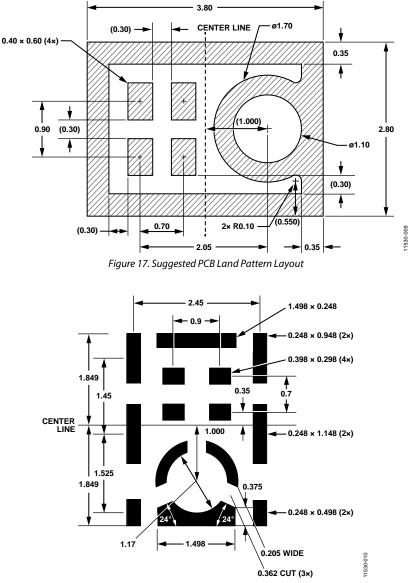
Suggested Solder Paste Stencil Pattern Layout
